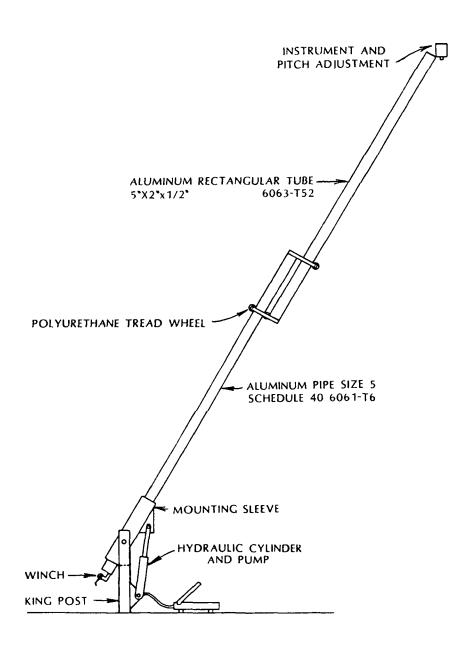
Schematic of the boom assembly used in 1982 for making radiation measurements.
